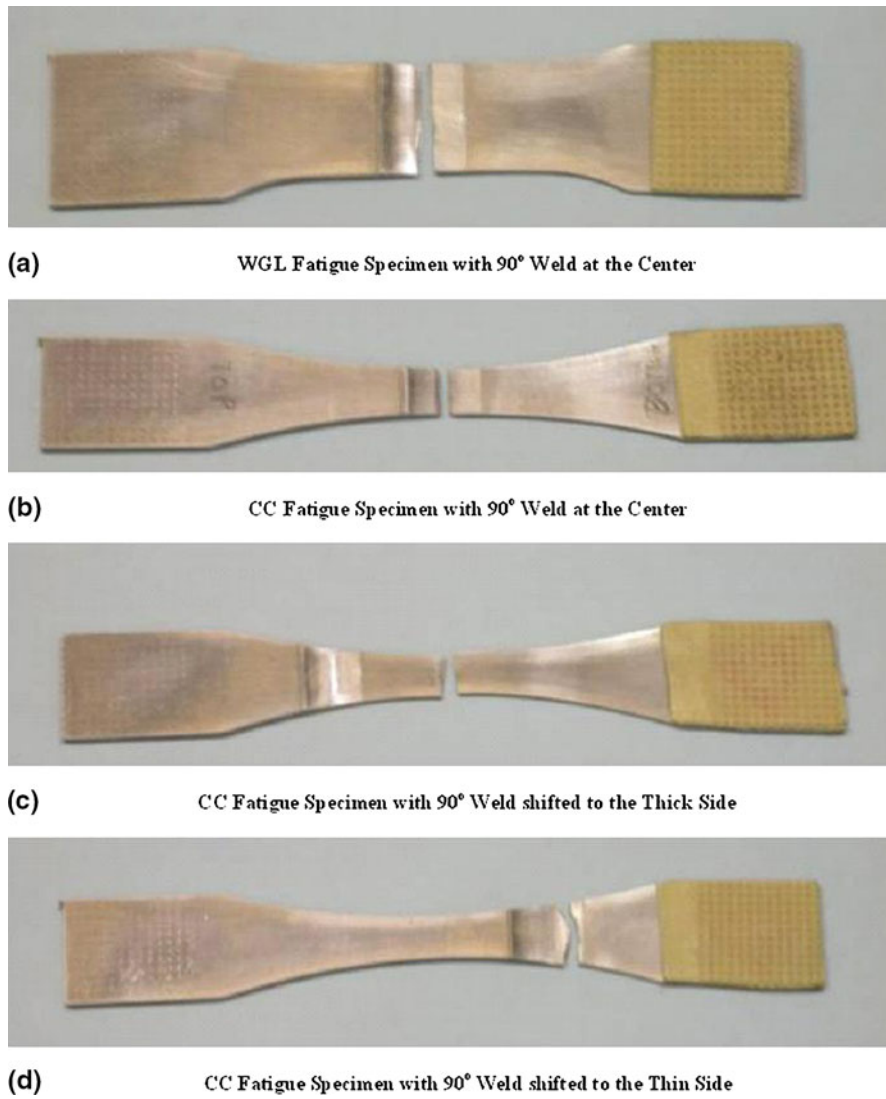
Photographs showing failure location in TWB fatigue specimens with 90° weld
